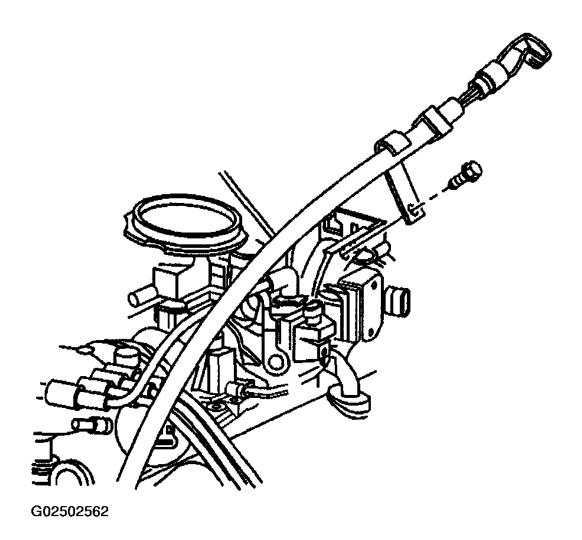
Installing Transmission Fluid Filler Tube Bolt At Accelerator Control Cable Bracket Courtesy of GENERAL MOTORS CORP.
